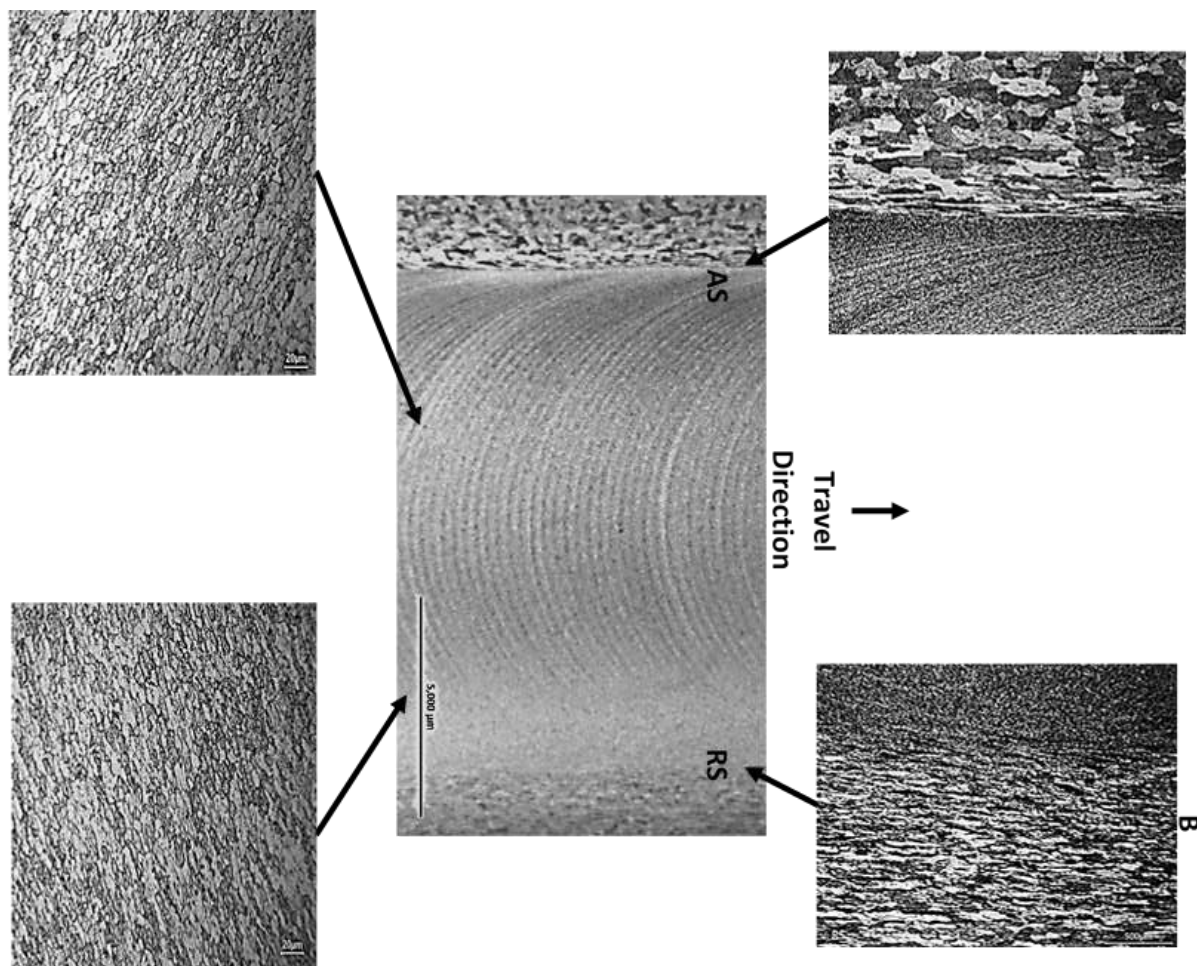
Midsectional plan-view of macro- and microstructure created by the FSW pin, tool spindle rotating clockwise at 400 RPM with feedrate of 4 IPM and plunge force 4000 lbf in 0.32 inches thick AA2219-T87. A closer inspection of the stir zone interface on the AS and RS is observed in A and B respectively. The microstructure of the stir zone illustrating the material flow pattern on the AS and RS is observed in C and D respectively.
